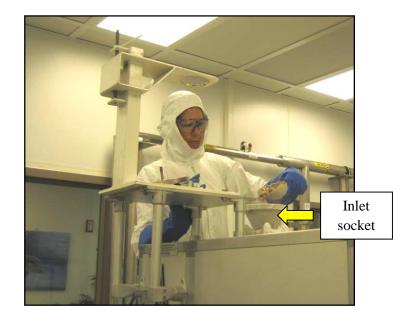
Cryomilling without the Vibrating Trough Conveyor
